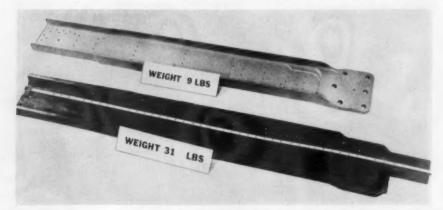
Illustration showing a titanium forging in the rough and machined stage.
